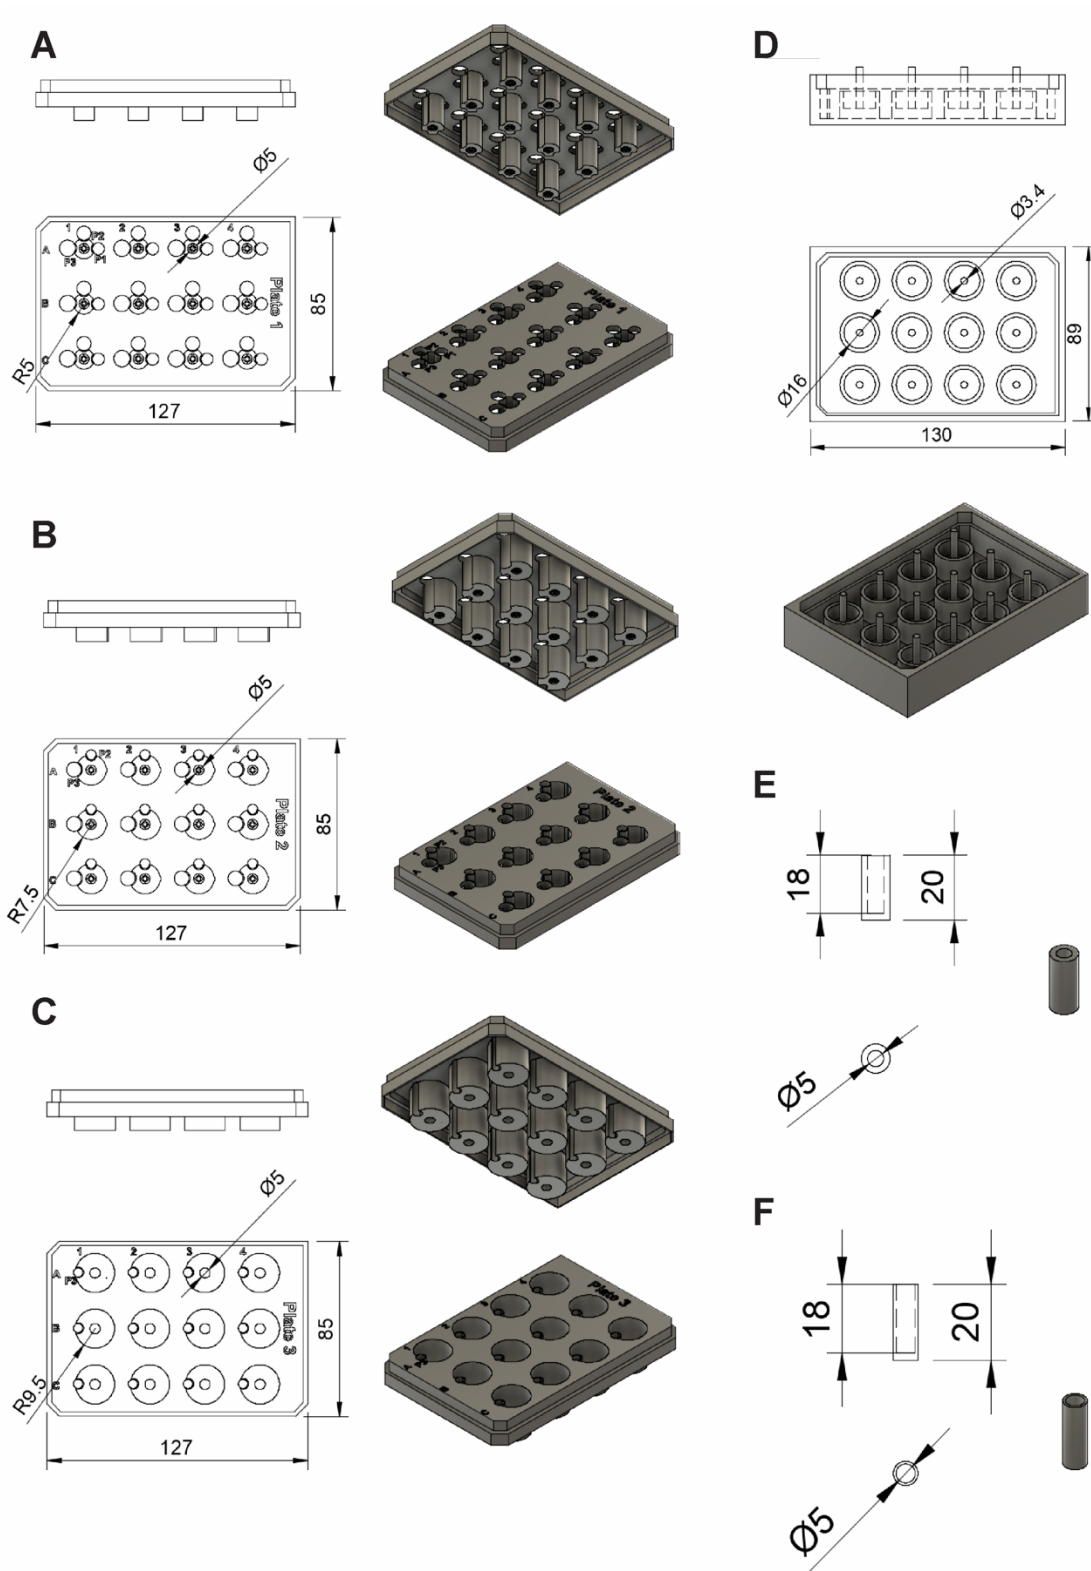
Technical drawing of 3D-printed inserts used for A) Caco-2, B) HUVEC, and C) HepG2 cells. D: Technical drawing of casting device. E: Technical drawing pillars used as
